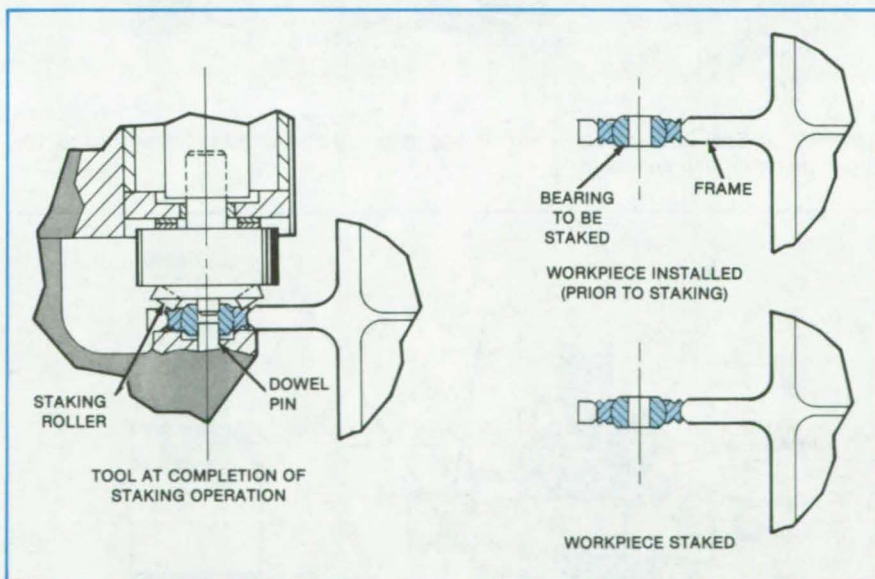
The Rollers Deform the Material at the edge of the workpiece so that the workpiece grips the frame. After staking the upper face as shown, the tool is flipped over to stake the lower face.
